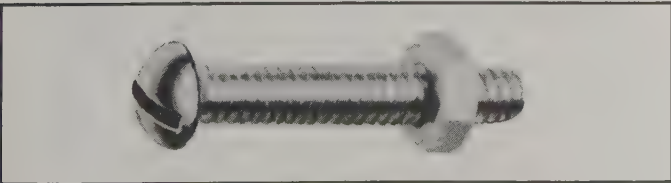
To mate properly, a machine screw and nut must have the same diameter and number of threads per inch. In larger sizes, machine screws are often referred to as stove bolts. (RB&W Corporation)
